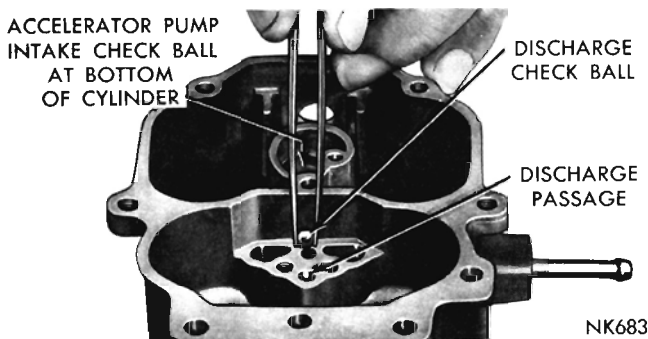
Installing Accelerator Pump Discharge Check Ball
